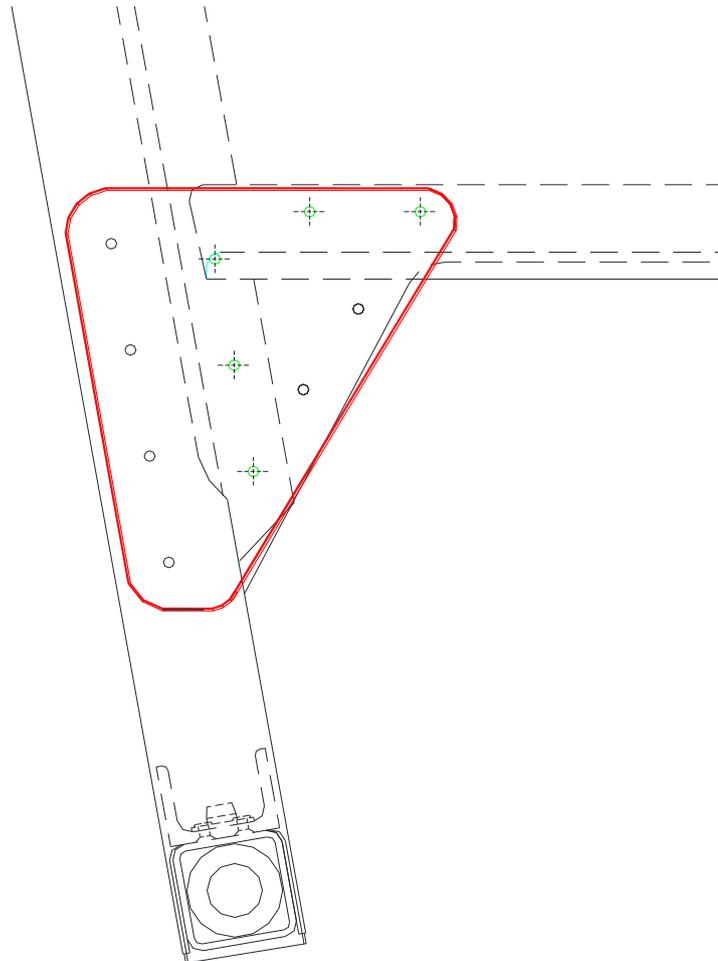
Seat back patch location, LHS of seat shown. View is from behind seat.
